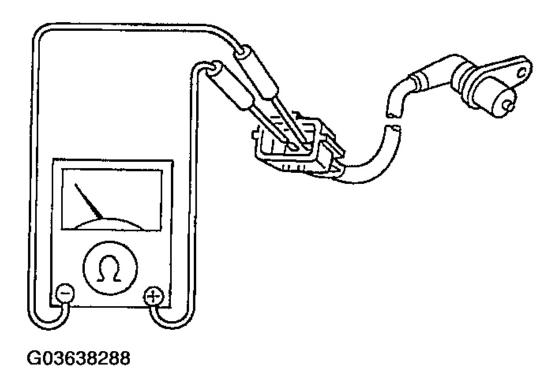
Inspecting Resistance At ABS Wheel-Speed Sensor Courtesy of MAZDA MOTORS CORP.
